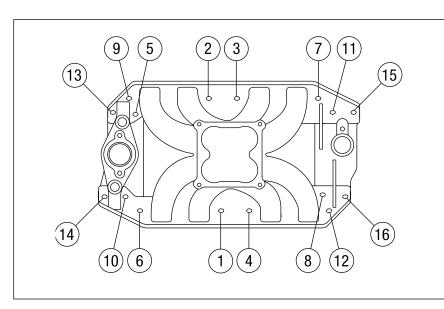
Manifold Bolt Torque Sequence Torque Bolts to 25 ft/lbs.
